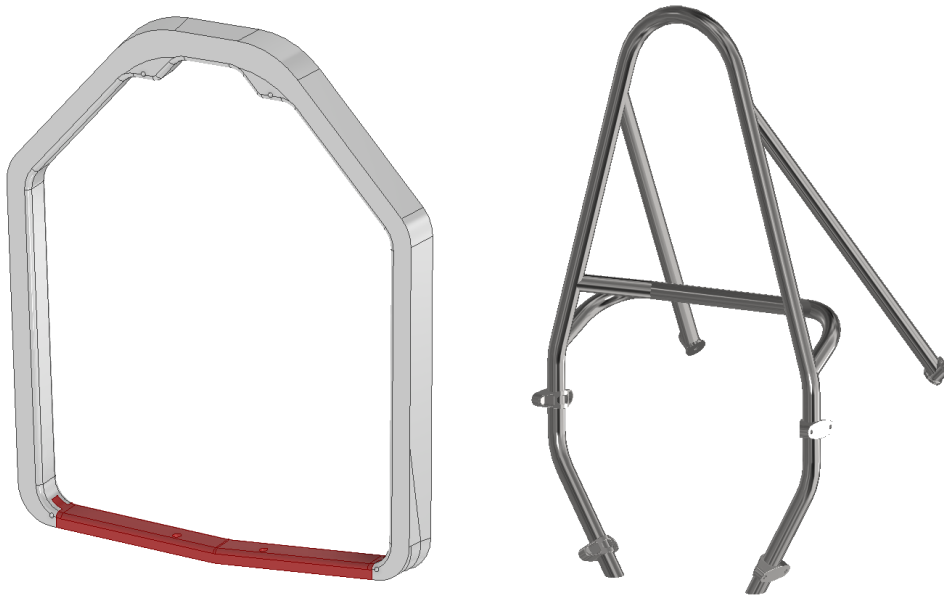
Aluminium front hoop and steel main hoop with bracings on the right.
